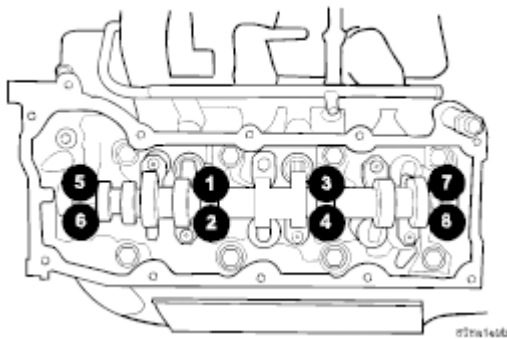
Identifying Installation Sequence Of Camshaft Bearing Cap Bolts
